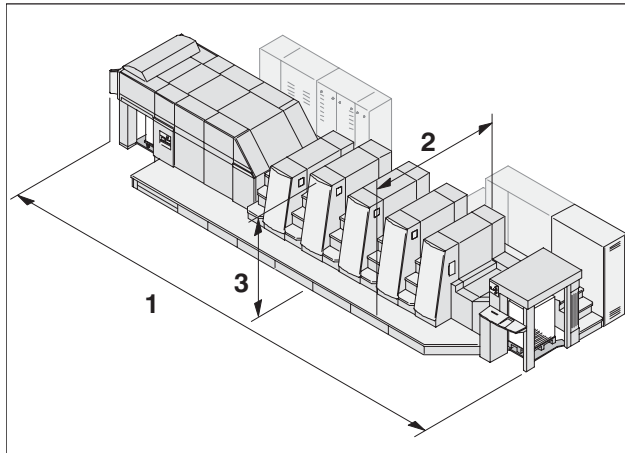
Dimensions of the printing press without DryStar UV in standard installation (XL 75-4 + L)
